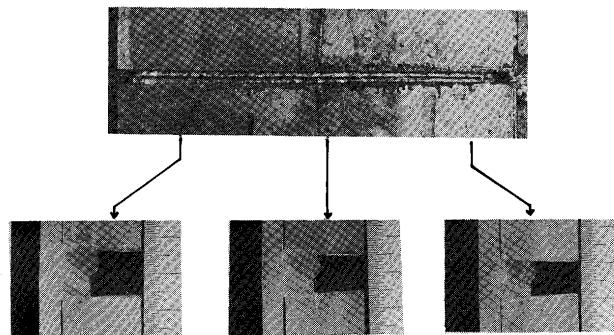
Bead appearance and weld cross sections which are controlled.
